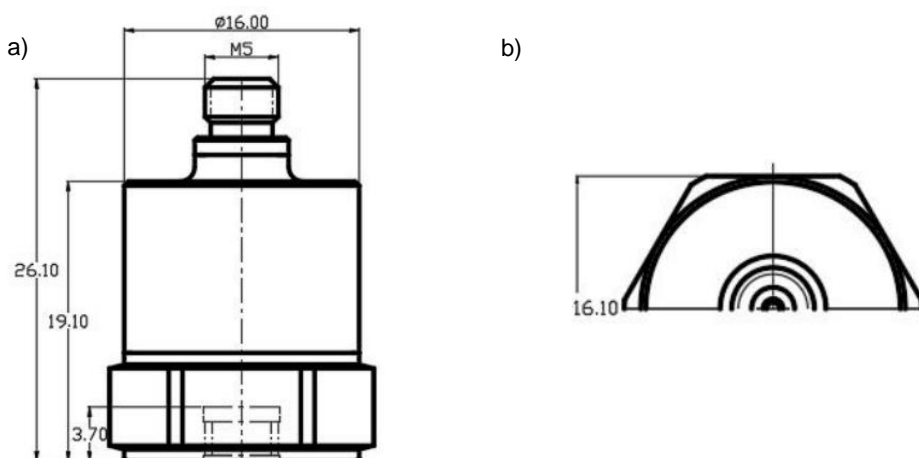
Mechanical dimension SSA-P9UCB5, SSA-P9UC4, SSA-P9UCB3 models a)side view b)top view
